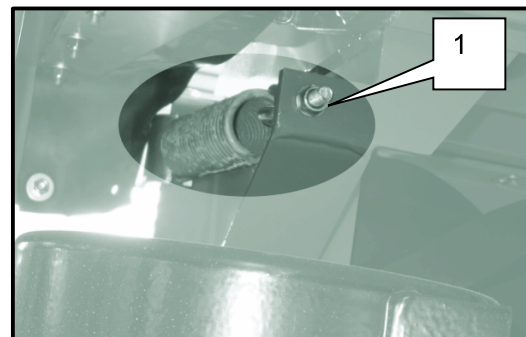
Setting the spring tension, right; example: SM 310 FZ-RC
